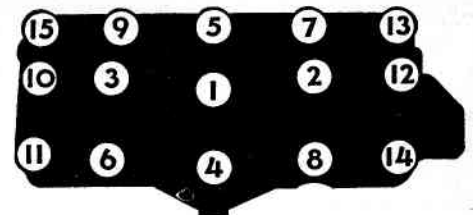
Cylinder head tightening. Four-cylinder F-head engines
